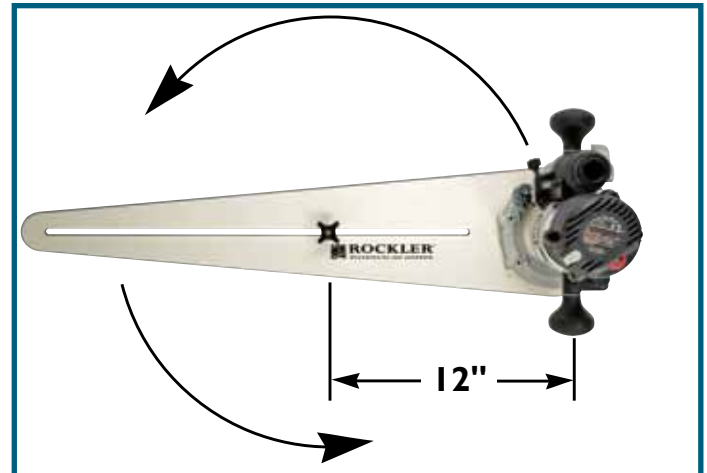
Top view of jig setup to make a 24" circle with 1/2" bit
